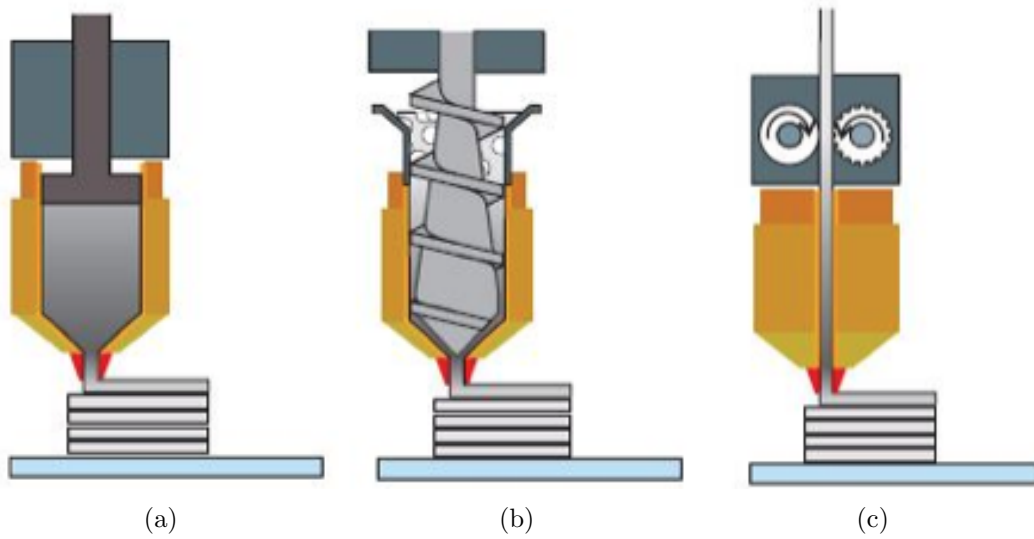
Working mechanism of Material Extrusion [4]: (a) syringe-type, (b) screw-type, and (c) gear-type print head.
